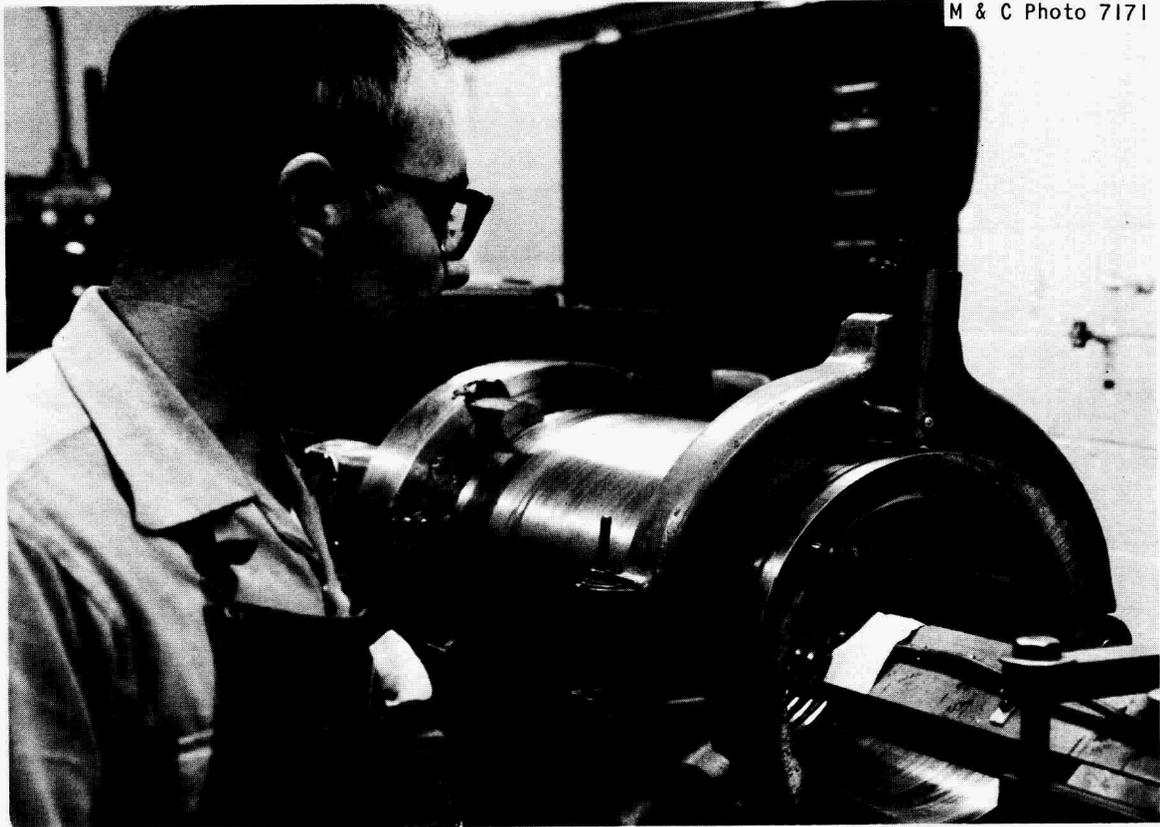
Weld Grooves Being Turned on Side Plate 3 in Restraining Tube.
